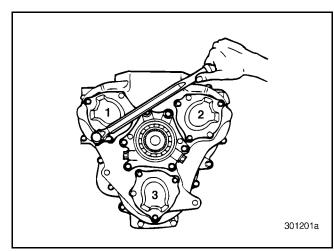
Tightening Rear Countershaft Bearing Cover Capscrews
